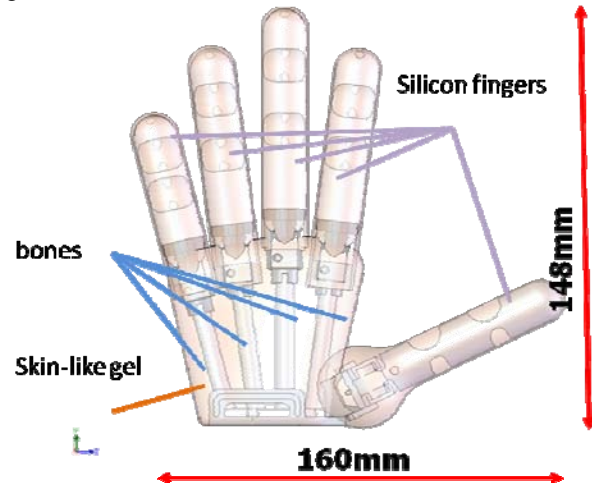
CAD image of the assembly of the hand, showing the overall size.
